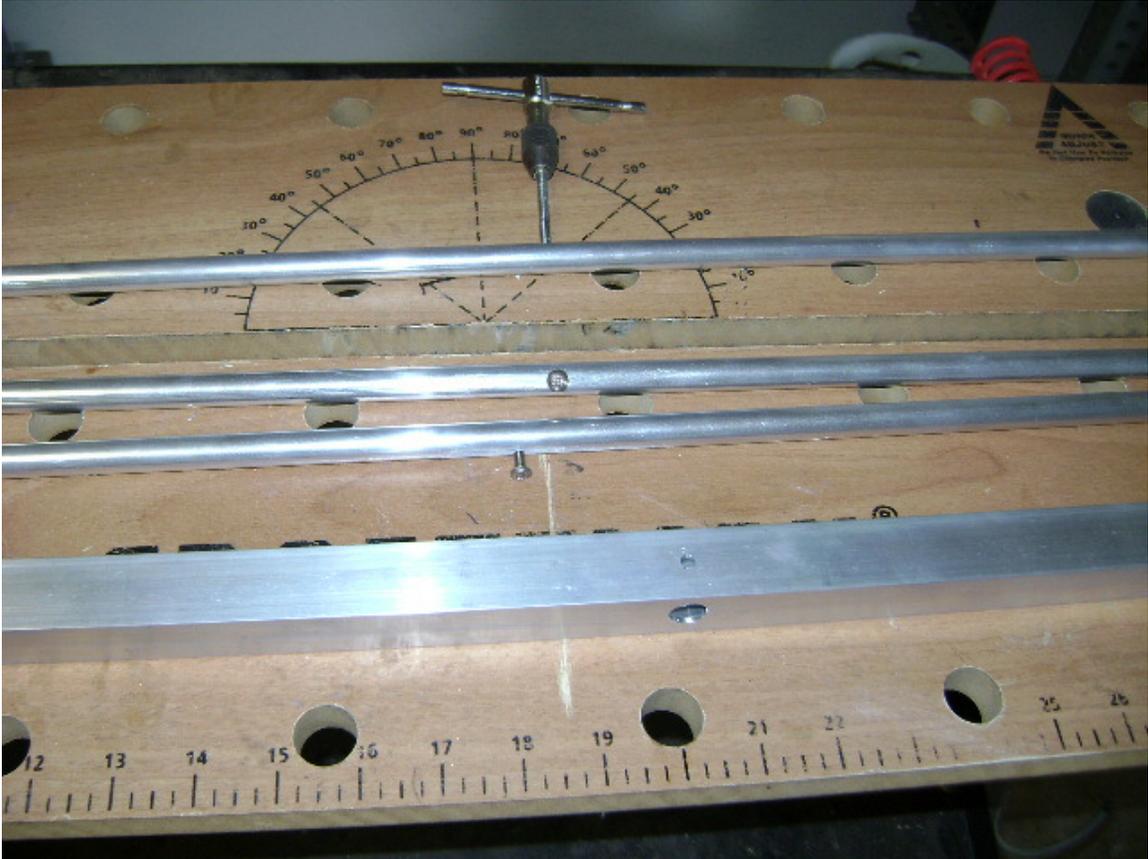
Yagi Assemblies showing a boom hole and element holes that have been tapped for 8-32 screws.
